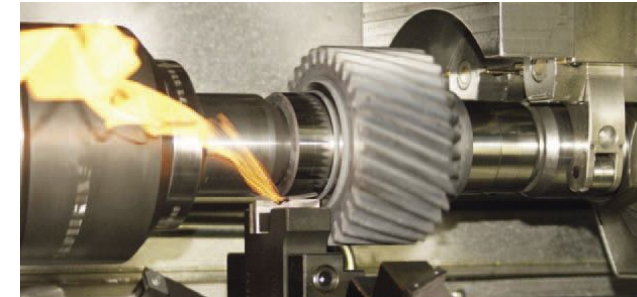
Clamping of a modular-like tool with one insert into a revolver head [7]
